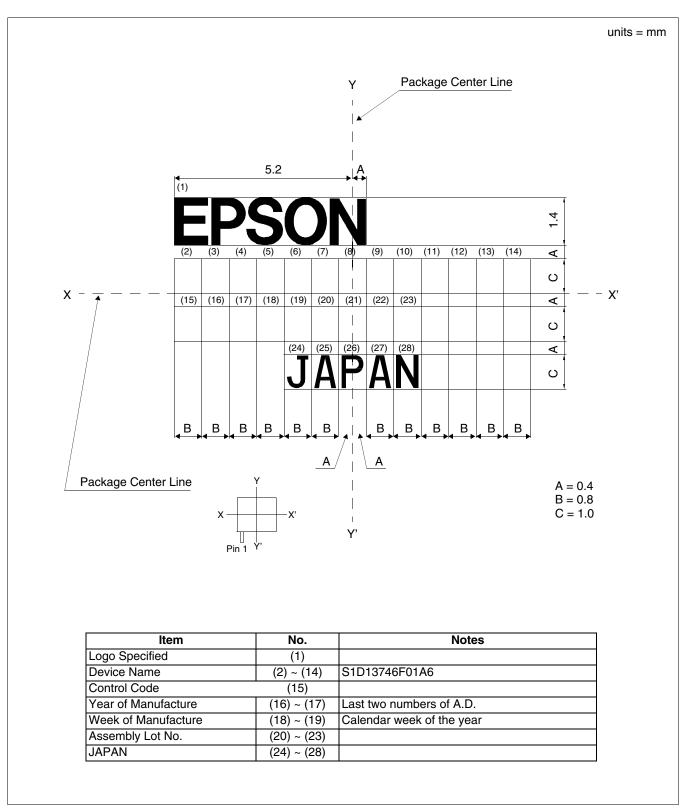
S1D13746 QFP15 128-pin Package Marking
